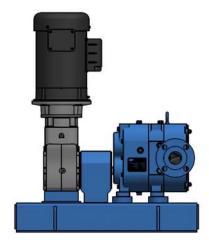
Right angle gear motor. Availability may be restricted based upon motor size and output speed.
